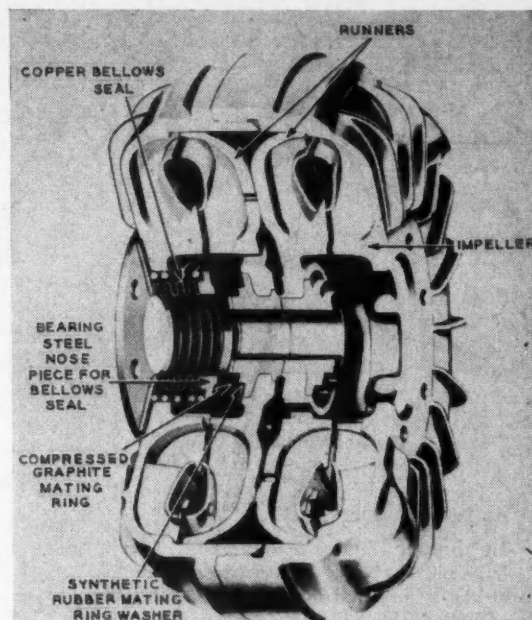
Cutaway drawing of small cast aluminum coupling.
